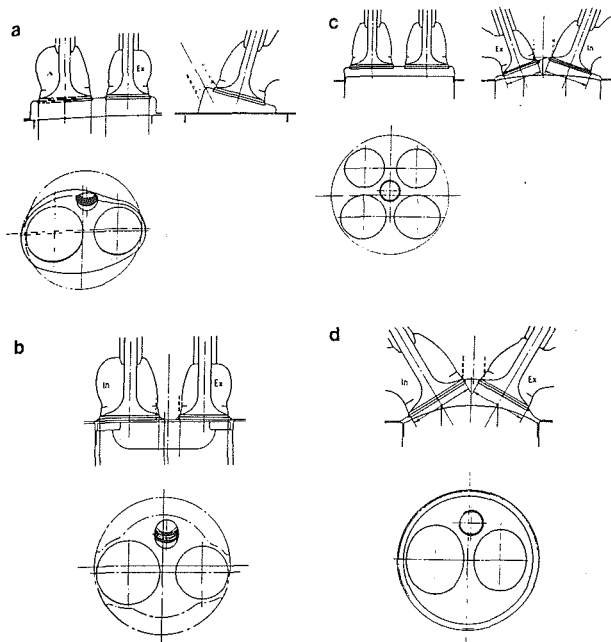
Common spark-ignition engine combustion chamber shapes: (a) wedge or bathtub; (b) bowl-in-piston; (c) four-valve, pent-roof; (d) hemispherical [14]
